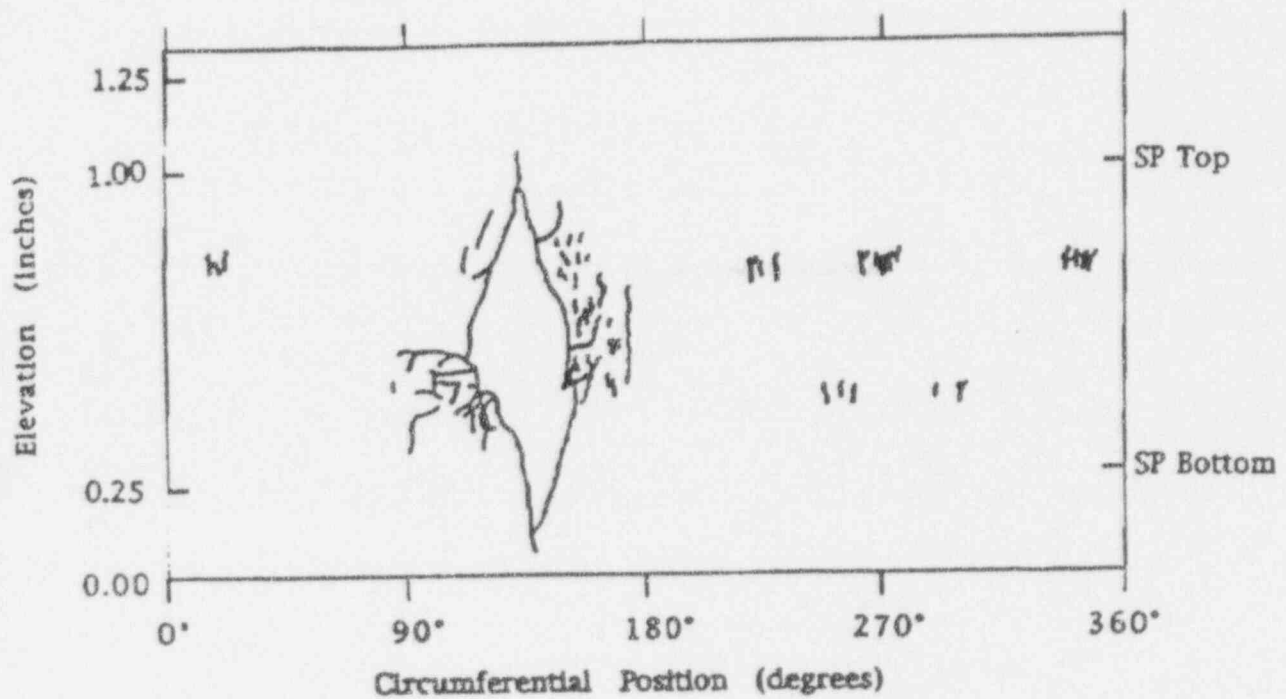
Sketch of the OD surface crack distribution found at the fifth support plate (SP5) crevice region of tube R42-C44. Also shown is the location of the burst fracture opening. (The burst opening extended beyond the SP crevice region, but the corrosion cracking on the burst fracture was confined to the crevice region.)
